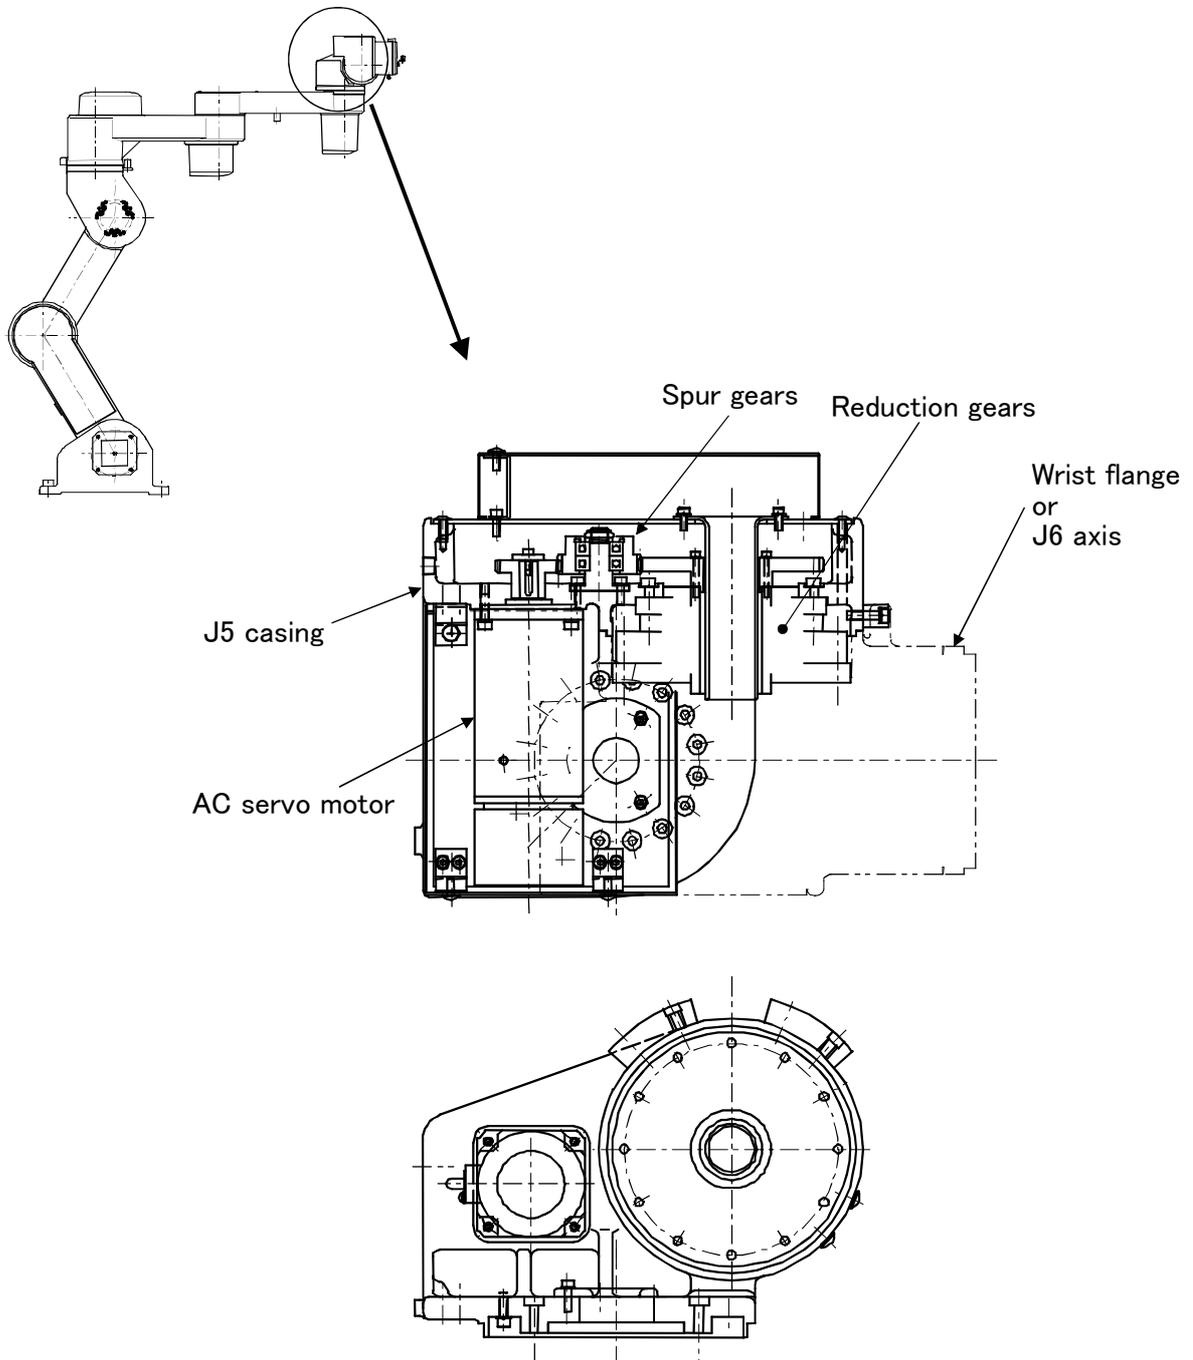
J5 axis drive mechanism (RH-1500G series)
